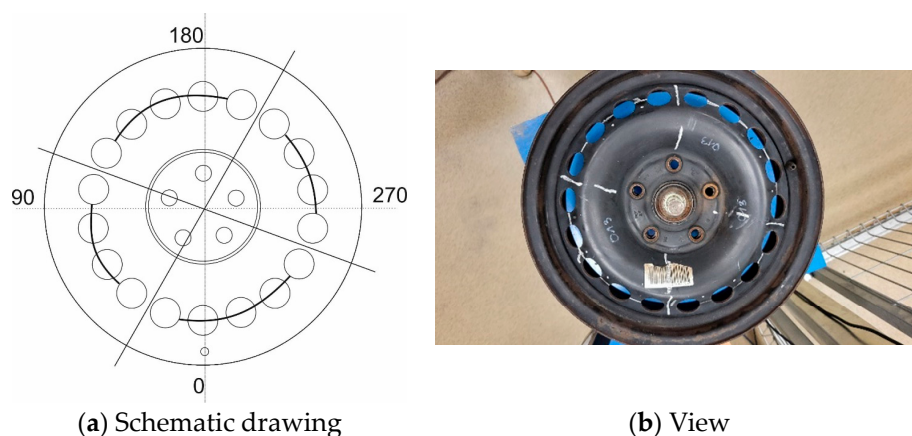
Artificially formed cracks on the rim disc: (a) Schematic drawing; (b) View.
